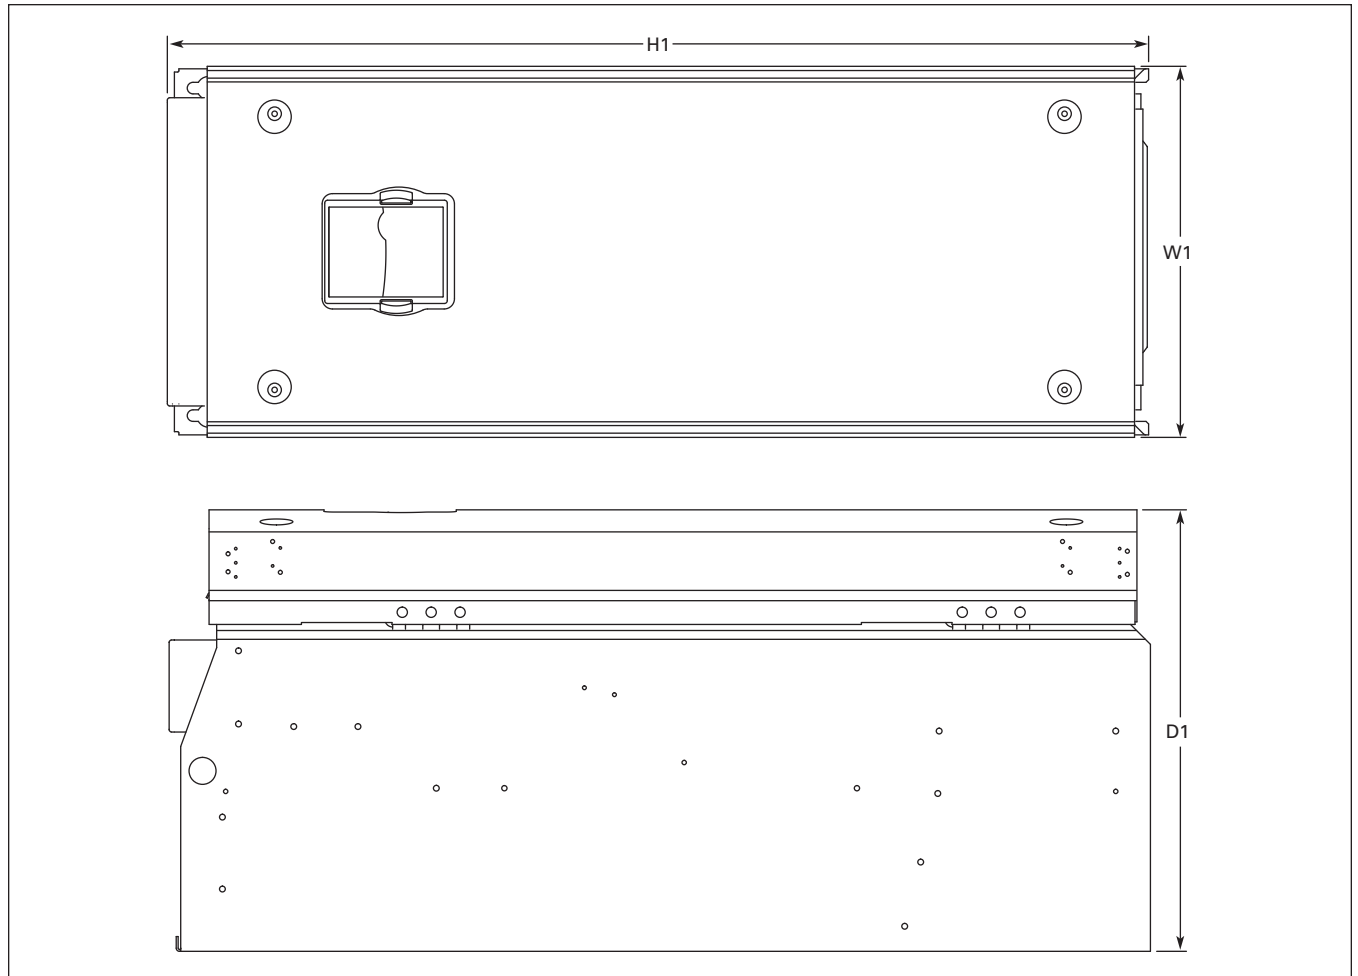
VSD Series Open Drive Dimensions, TYPE 1 and TYPE 12, FR8
